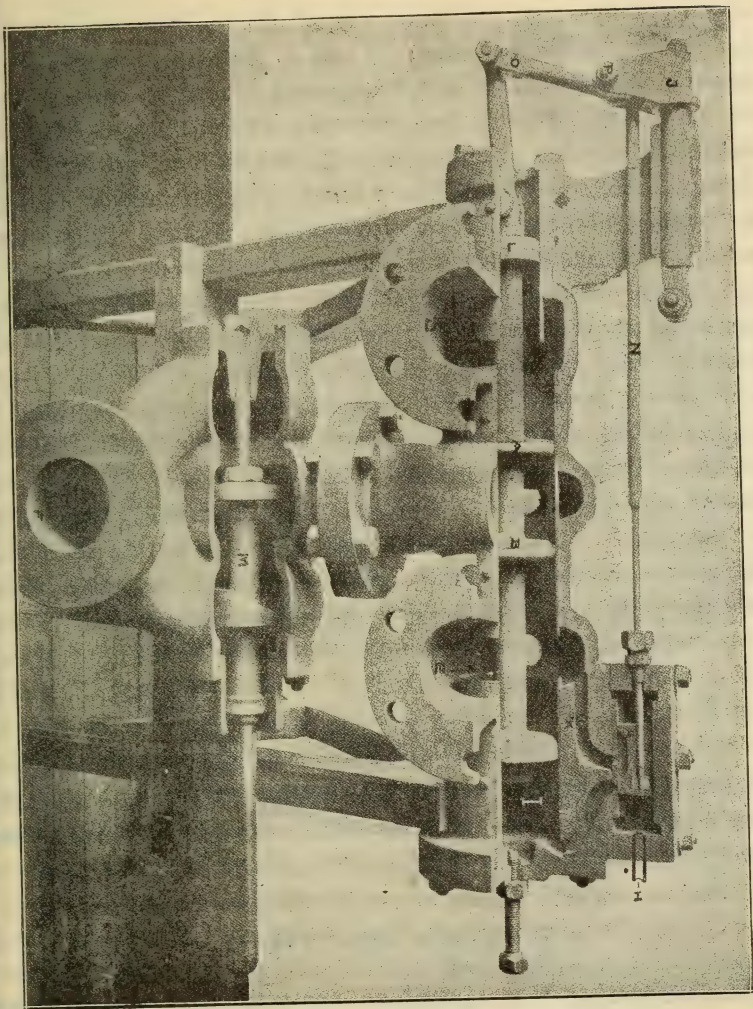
Auxiliary valve for Crane hydraulic passenger elevators.
